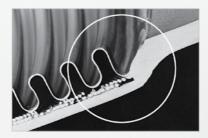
Seamless and burr-free connection of a metal hose.
